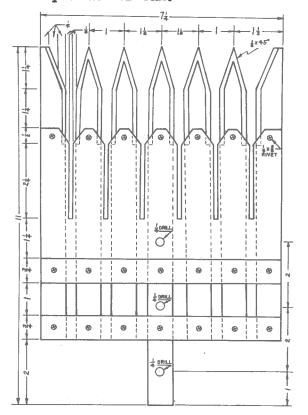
"Inside" plan view of the tine-cutter subassembly. (Dimensions are in inches.)
